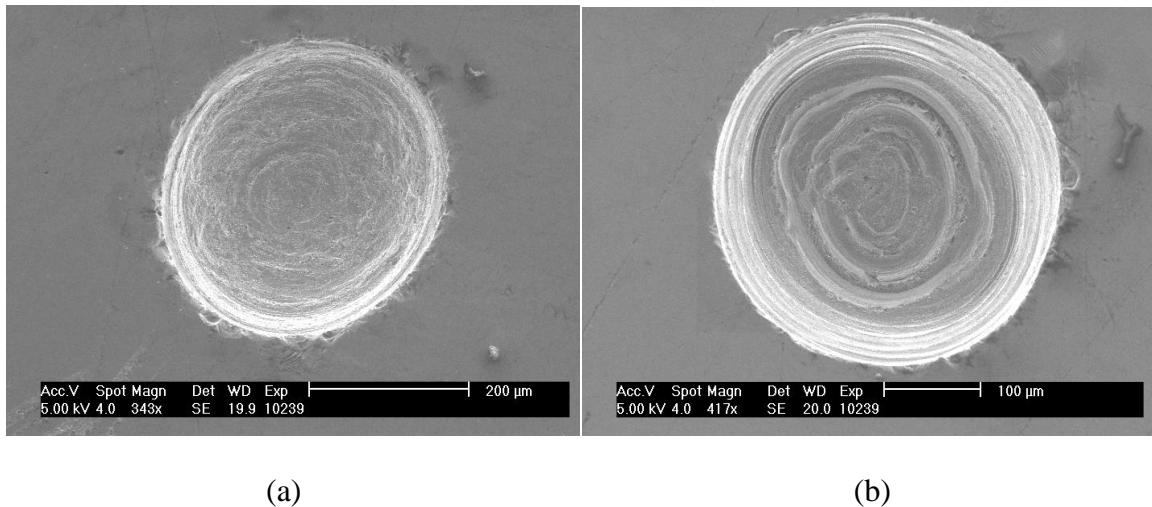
Different contributions of brittle and ductile machining: (a) ductile machining is less evident (b) ductile machining is more evident because of the scratches present
